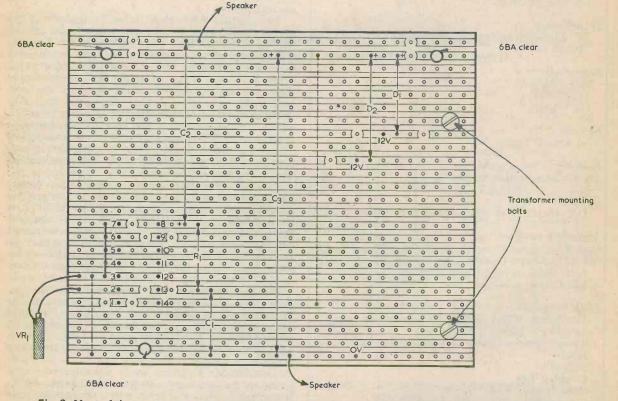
Most of the components are assembled on a Veroboard panel. This diagram illustrates the copper side
